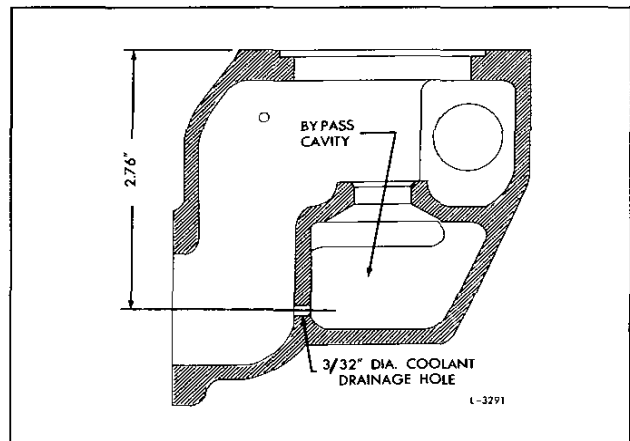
Cross-Section of Thermostat Housing (Early Industrial In-line Engine)
